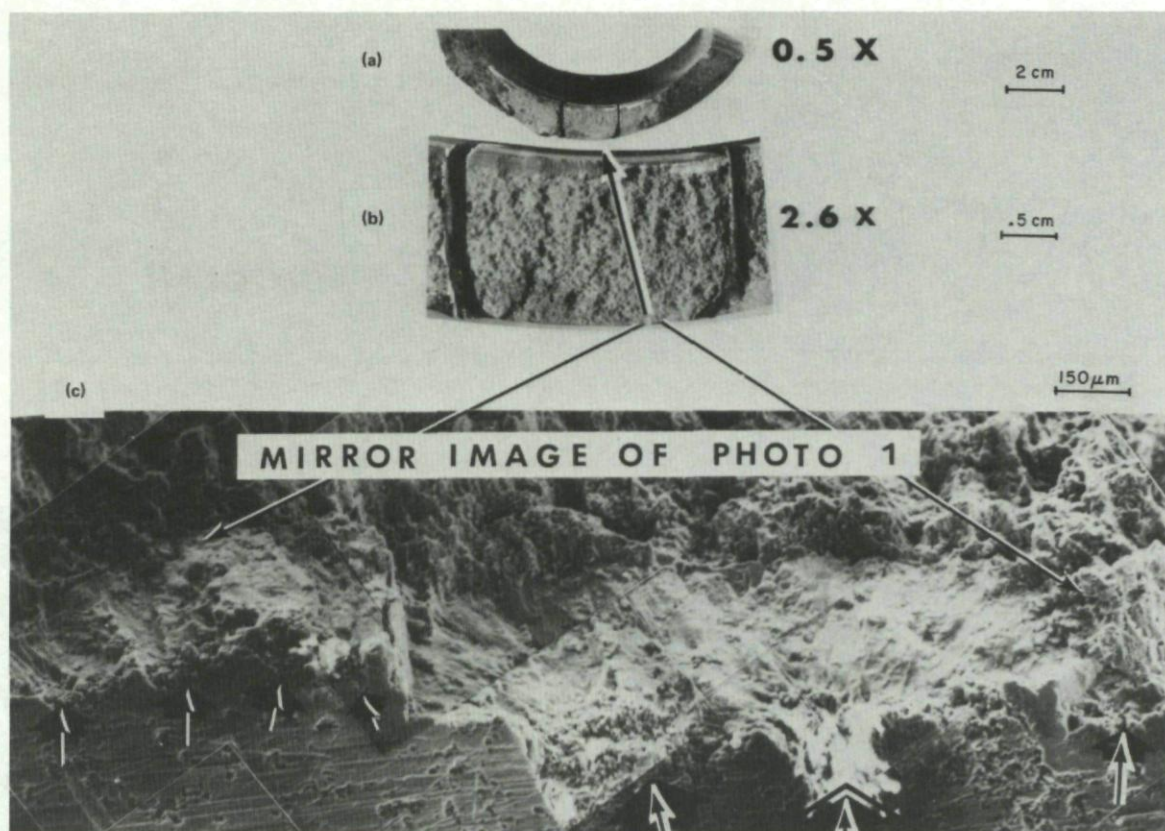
Pitting corrosion and fatigue of a 2014 aluminium alloy main landing gear strut
